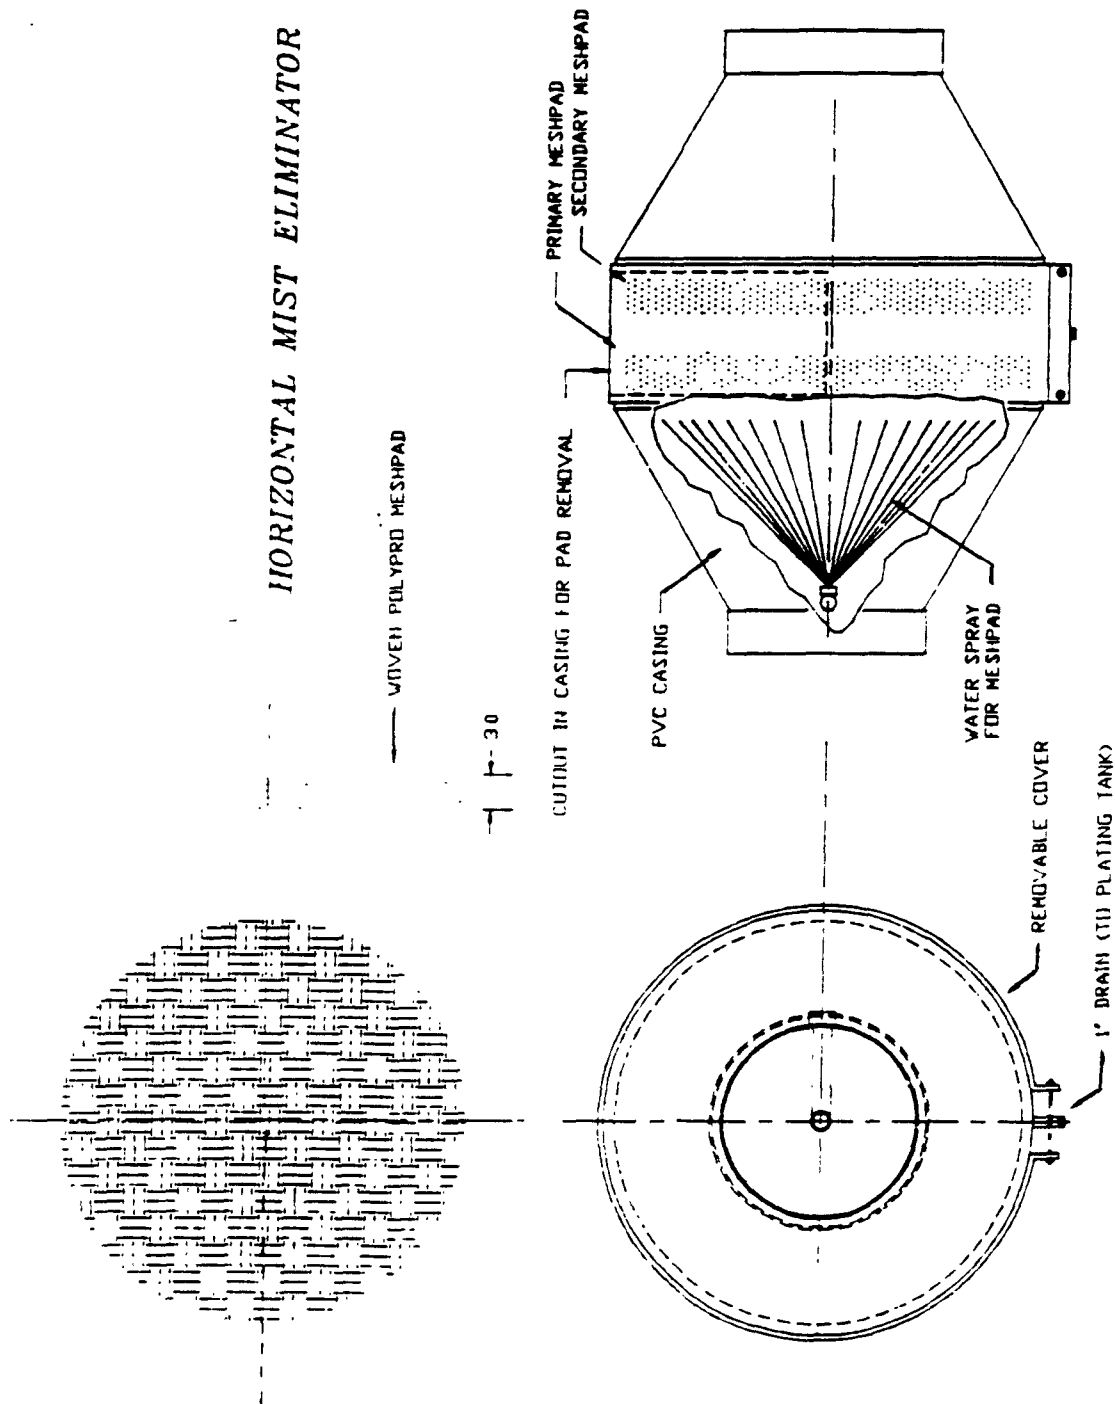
Cross-sectional view of mesh-pad mist eliminator at Precision Machine and Hydraulic, Inc., Worthington, West Virginia.
